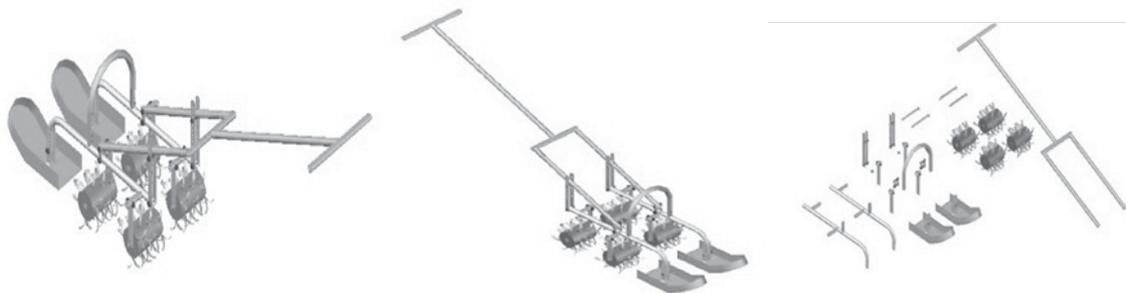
AutoCAD drawing of BRRRI double row weeder.
